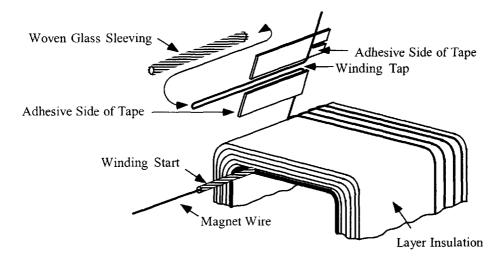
Tap Lead: Step 1, Showing the Exploded View, Using Sleeving.
